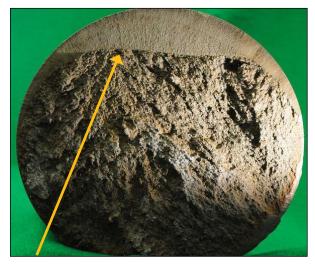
Arrow showing where the failure point started at the top section of the center column.
